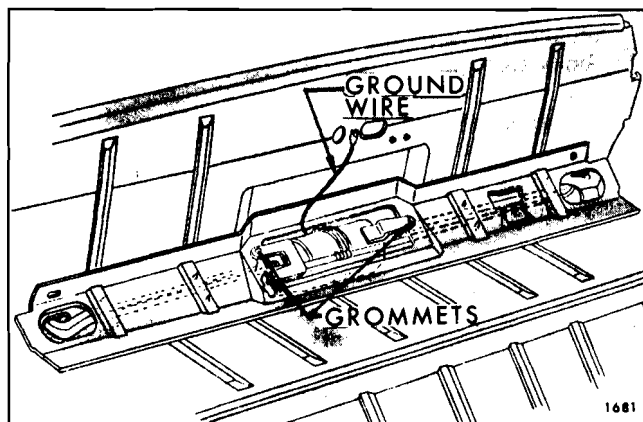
Motor and Pump Installation "B, C & F" Styles
